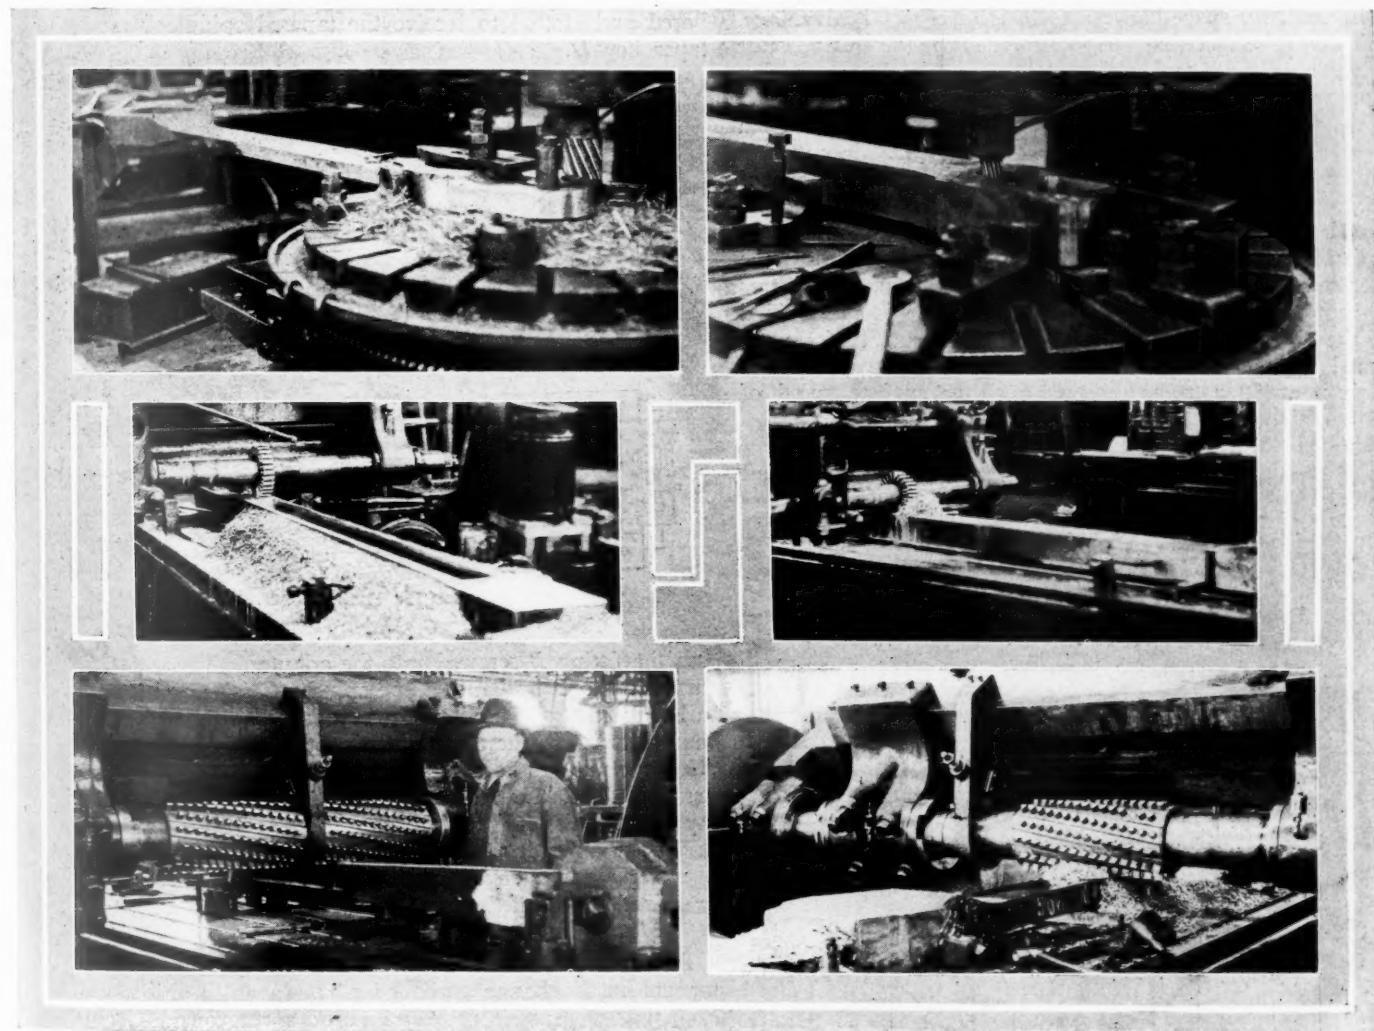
Examples of Locomotive Work Done with Modern Milling Cutters
